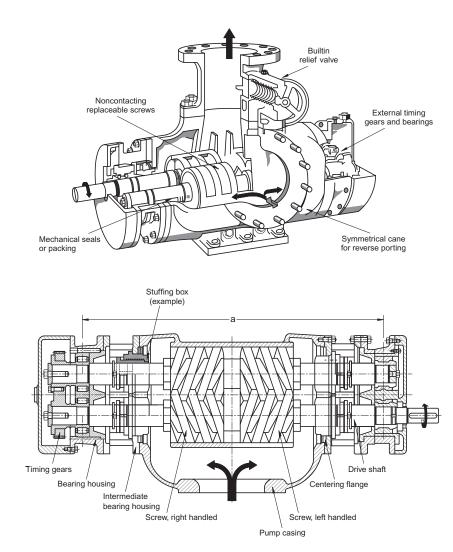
Two-screw rotary pump. Courtesy of IMO Industries: Pump Division.
